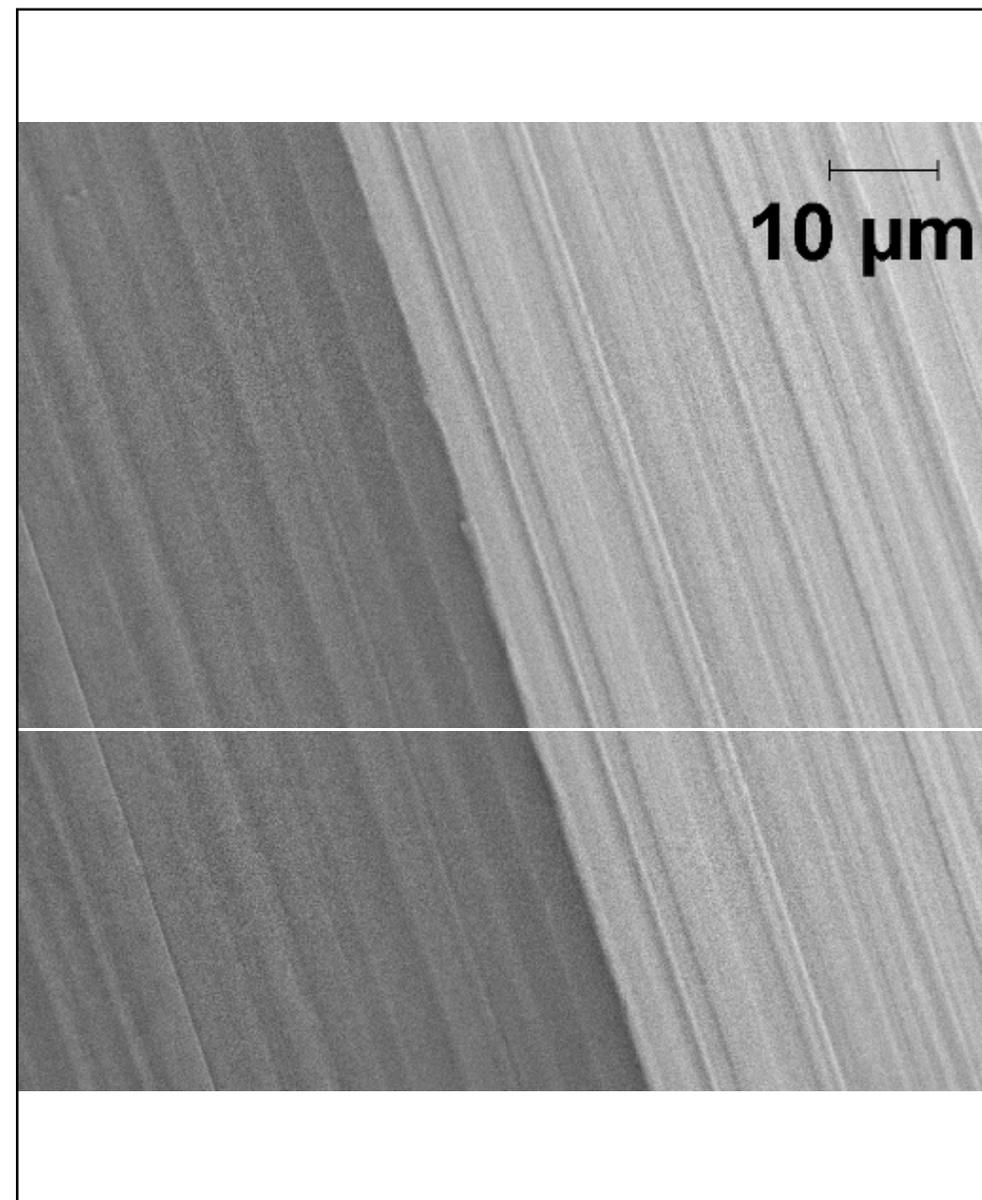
Orion cathode, as-machined. Mg (left)/ Cu (right) boundary. The weld-line is tight around the full 360 degrees.
